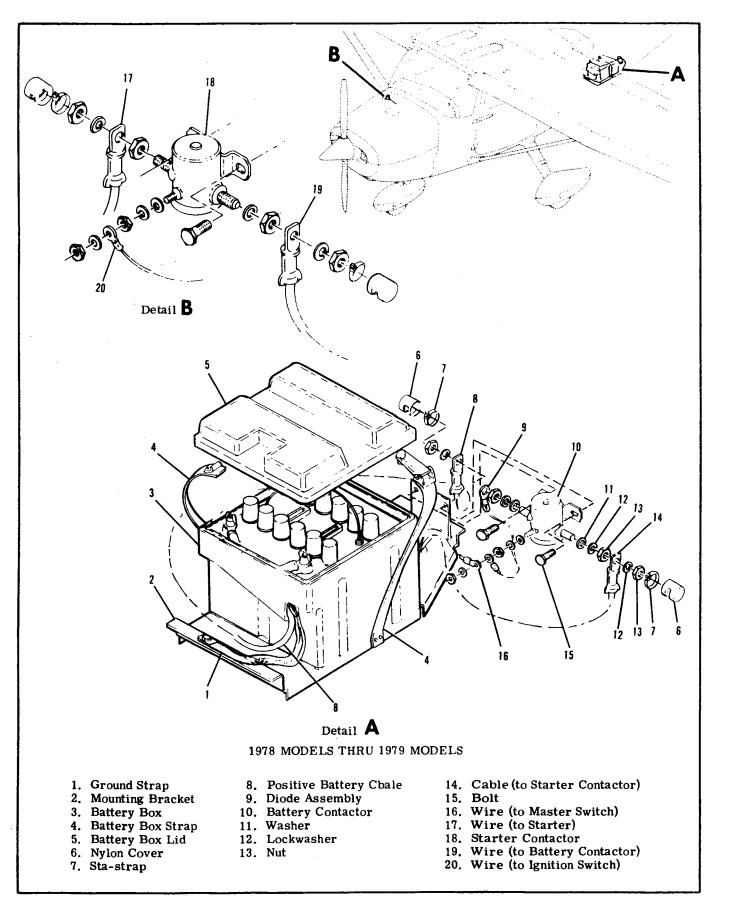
Battery and Electrical Equipment Installation (Sheet 2 of 4)
